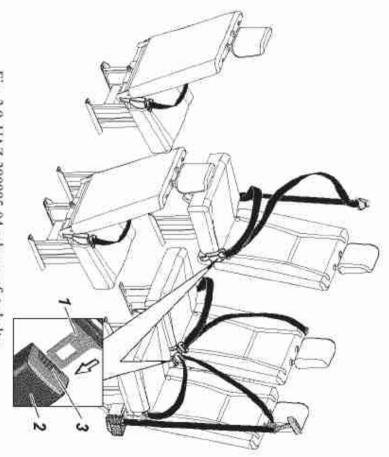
UAZ-390995-04 saloon safety belts: 1 — latch plate; 2 — lock; 3 — lock button
